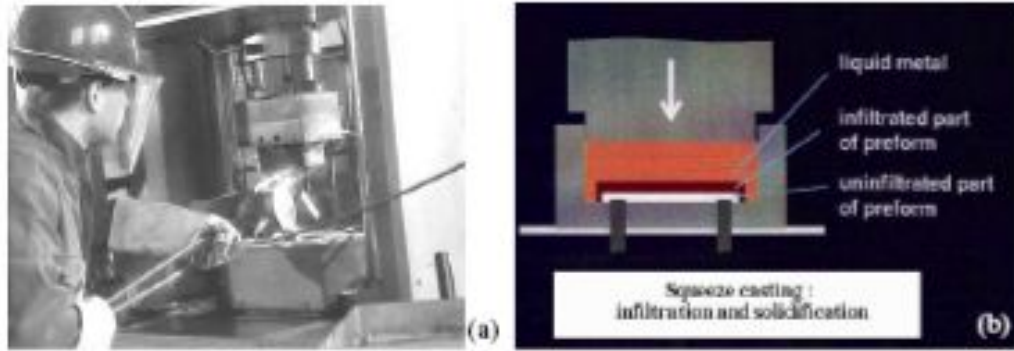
Infiltration by squeeze-casting (a) liquid metal pouring, (b) process scheme
